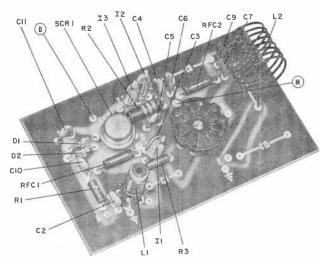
Except for the necessary inter-unit wiring, the printed circuit board must be fully assembled as shown here before it is installed on the chassis.
